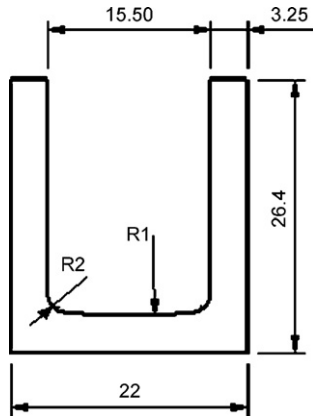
Geometry of the finished product (dimensions are in mm).
